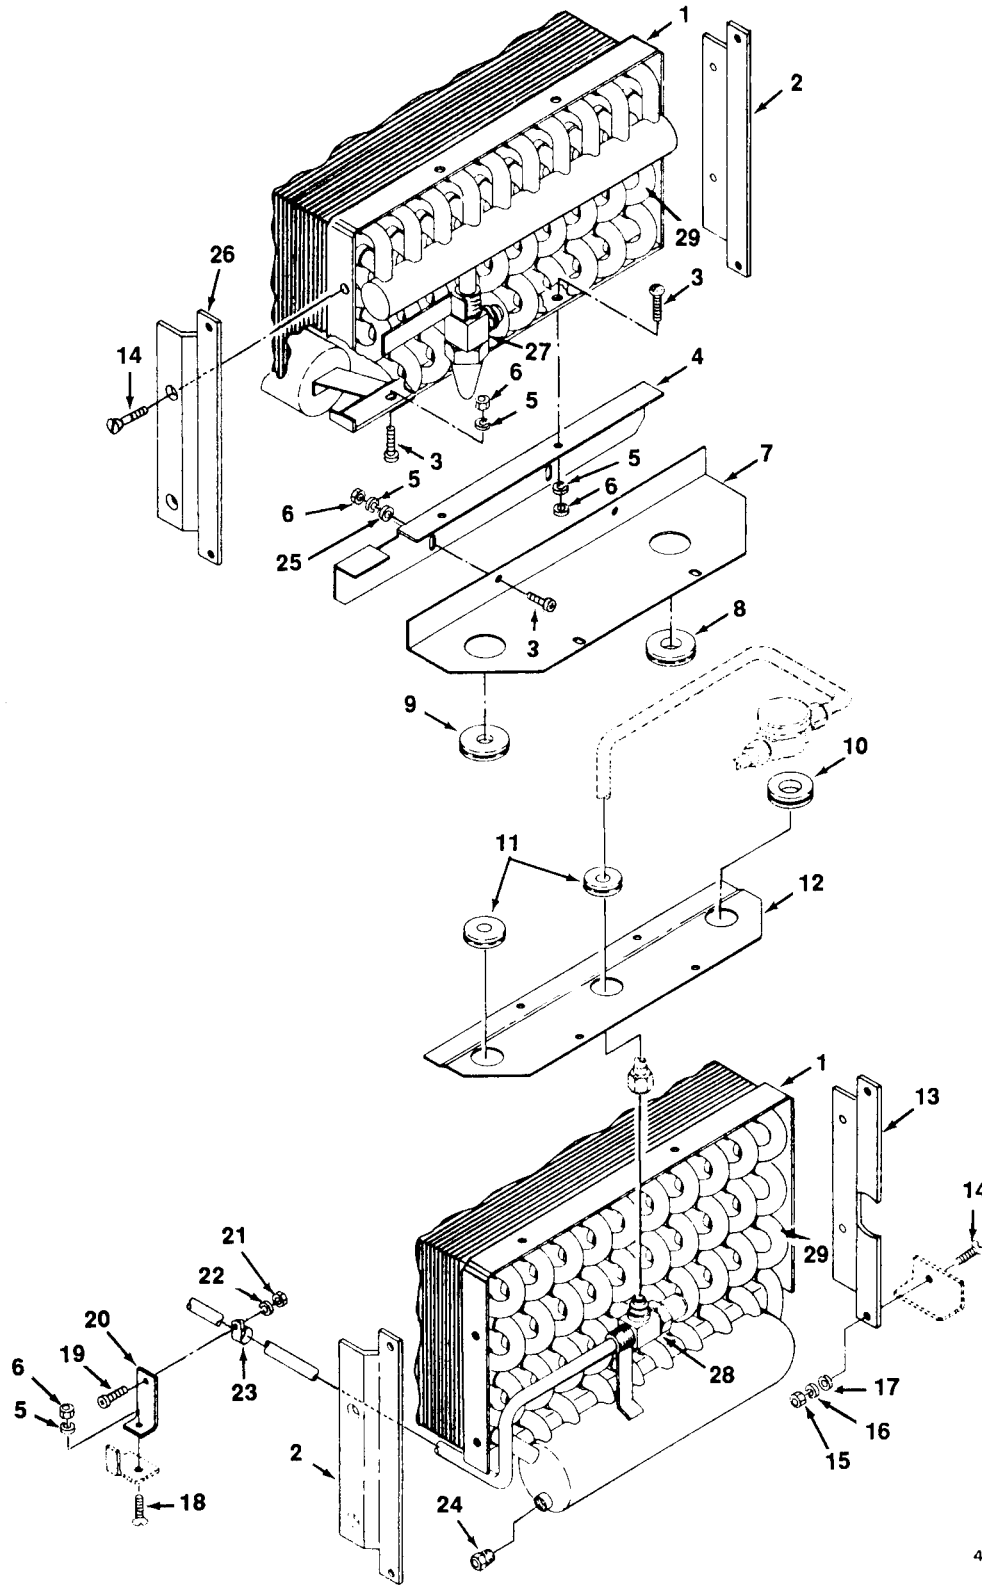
Condenser Coil Section, Covers, Panels and Frame.
